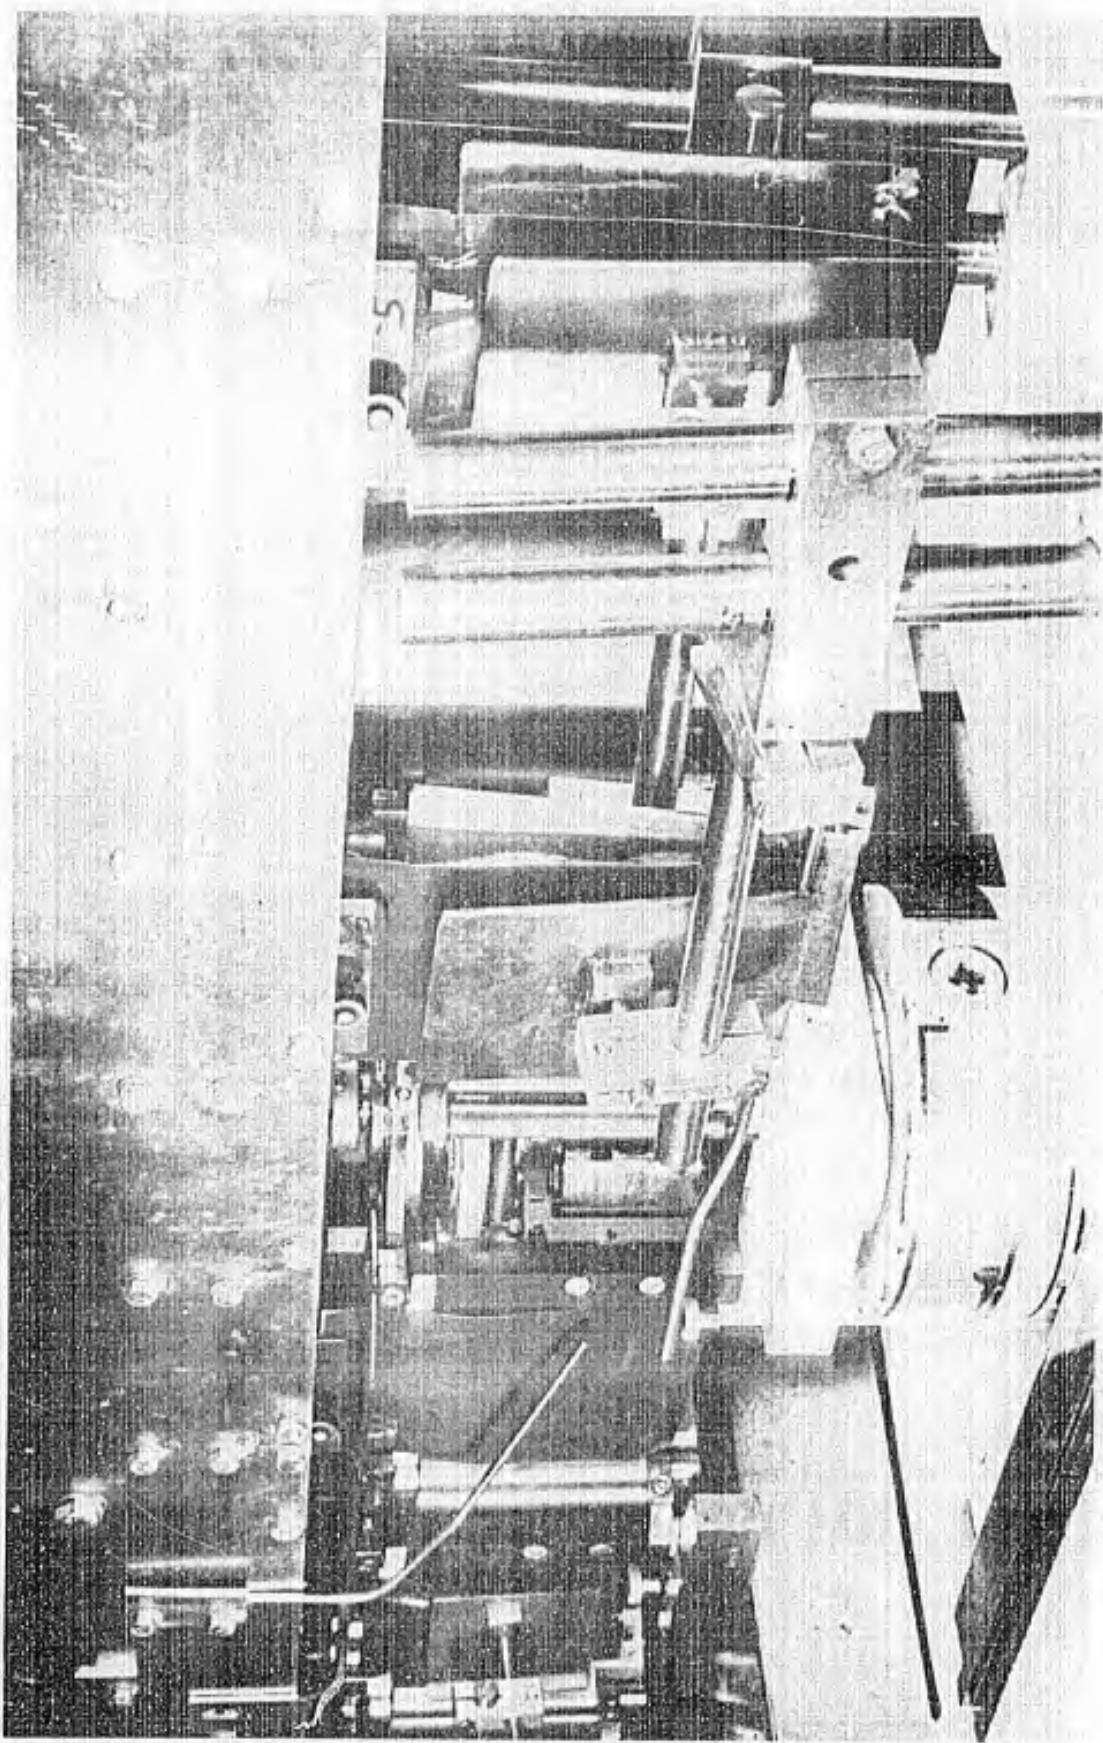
Pouch Flattener Stations on Bartelt Packaging Machine
